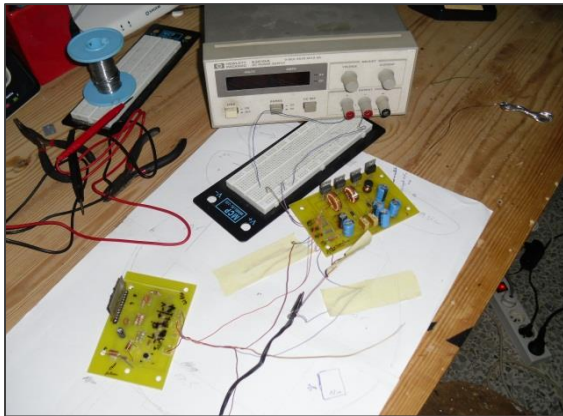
The final testing process was to build the circuit on a printed circuit board.
